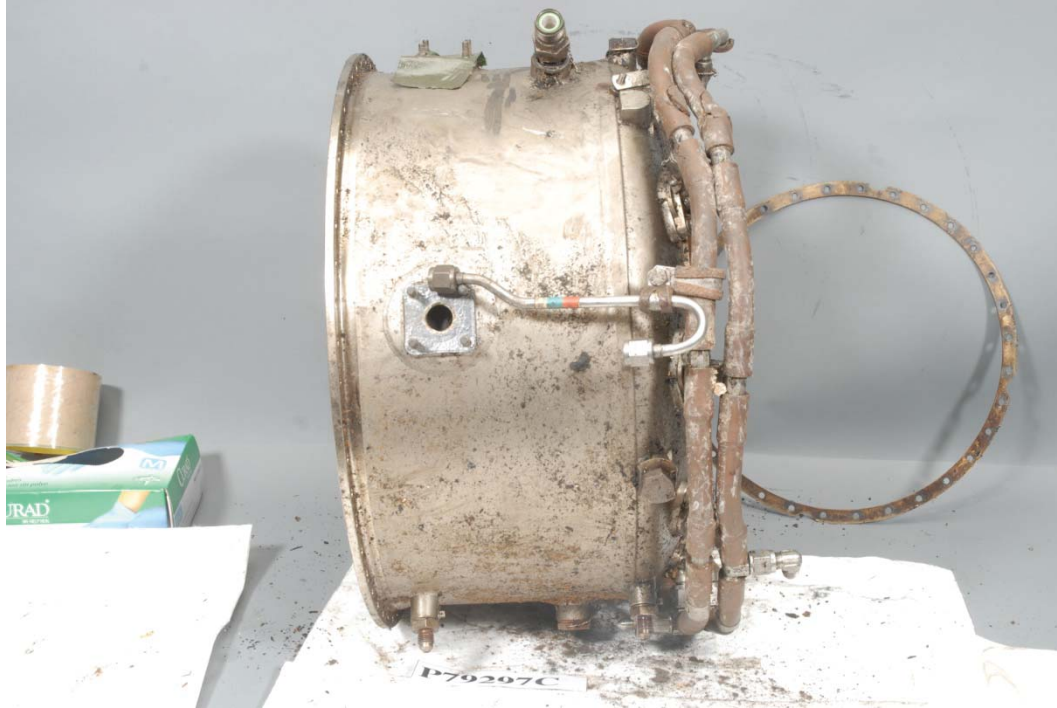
P-79297C, Combustor Section Assembly, ALF
